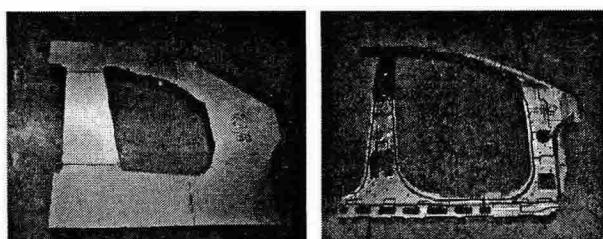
Laser welded and press formed combination side inner TB
